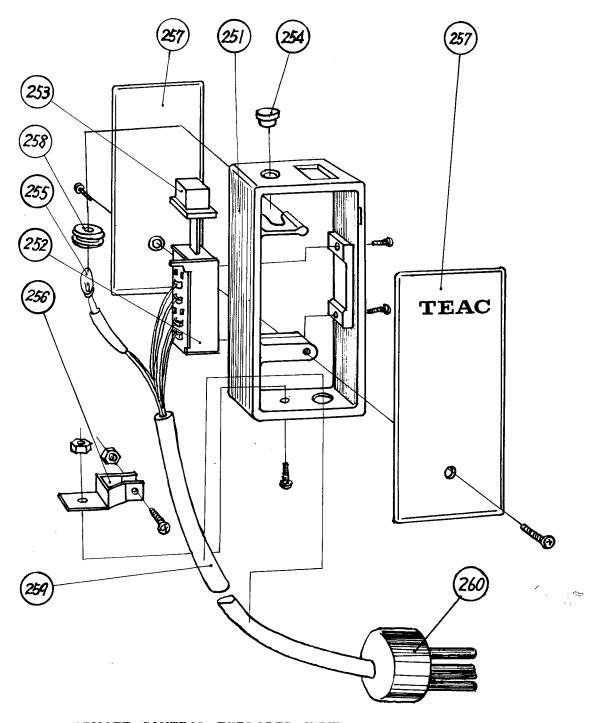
REMOTE CONTROL, EXPLODED VIEW
